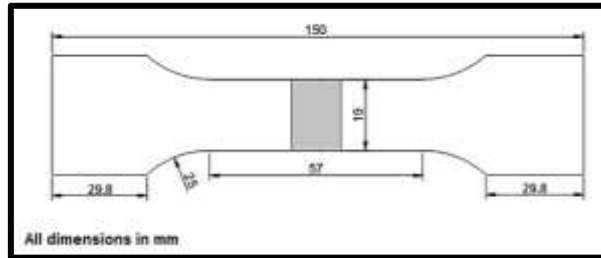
Standard dimensions of tensile test specimen for FSW [10].
